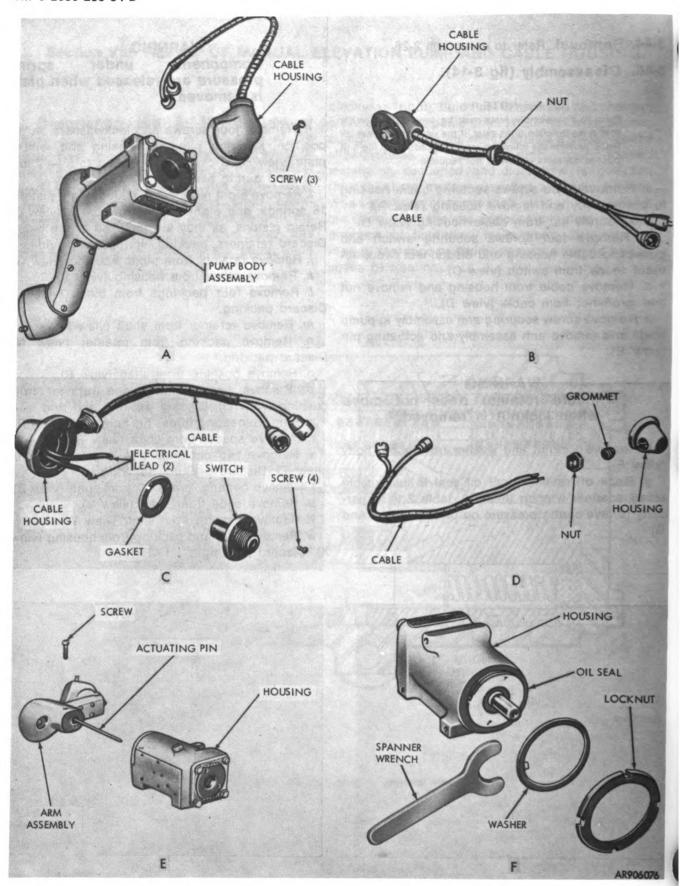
Manual elevation pump disassembly or assembly (1 of 4).
